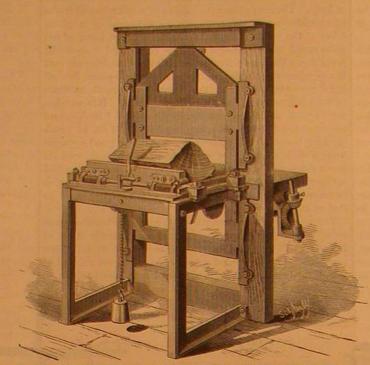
TREVOR & CO.'S SHINGLE-CUTTING MACHINE,
